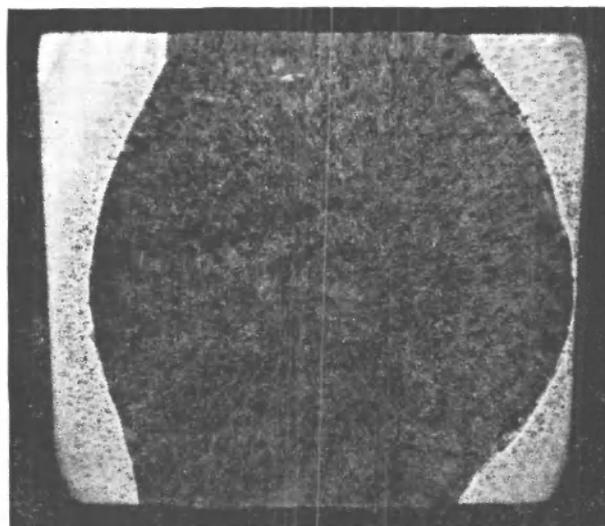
Macrosection of a doubleguide butt weld between 3 in. thick plates in which the weld metal was alloyed with nickel chromium and molybdenum.
